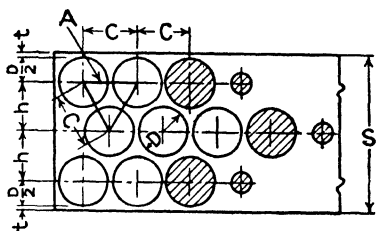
Illustrating the formulas for laying out and computing scrap-strip layouts for cutting round blanks.
